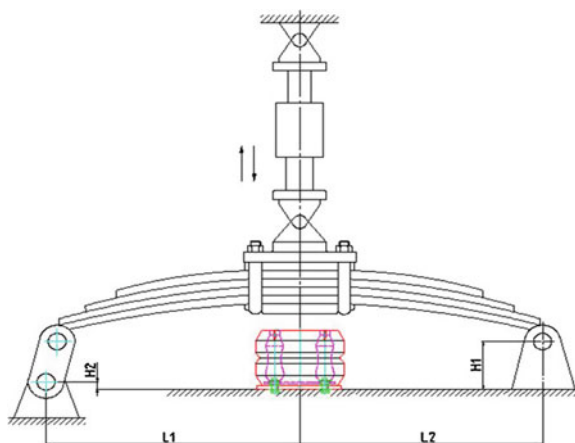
Low-temperature test of rubber auxiliary spring
